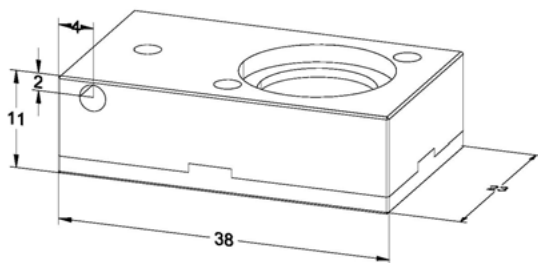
Dimensions of the packaged defocus corrector, in mm
